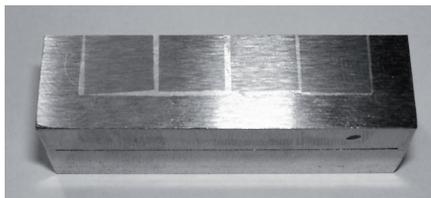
Correctly completed WC-Co ISO K05 sinter – Cu brazing filler metal – 14-5 PH steel joint
